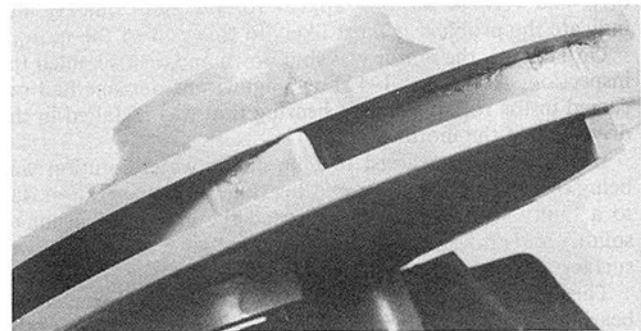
Closeup view of pump impeller that shows crack that runs the length of the joint between the vane and shroud. Also note the locations where material was removed from the vane by cavitation.
